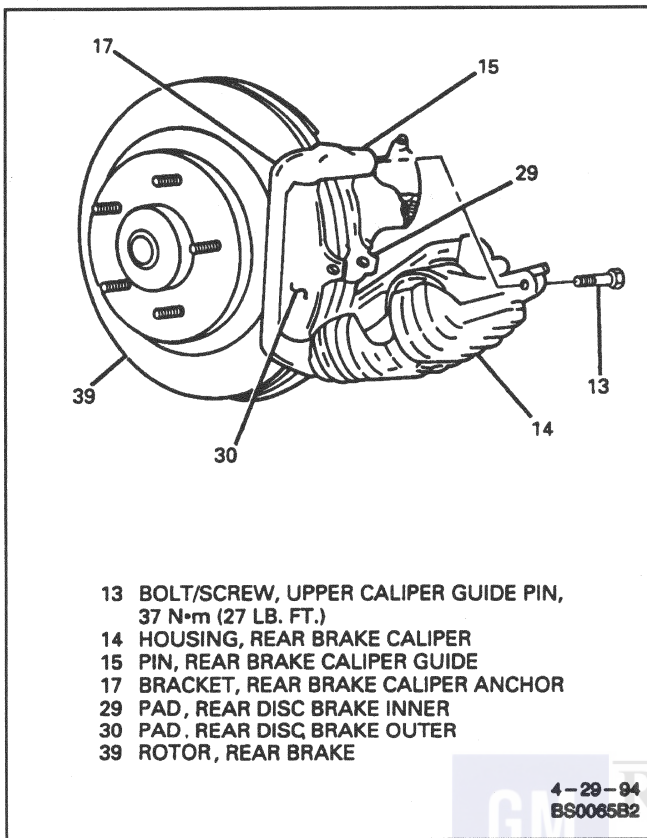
Rear Disc Brake Inner and Outer Pad Replacement
